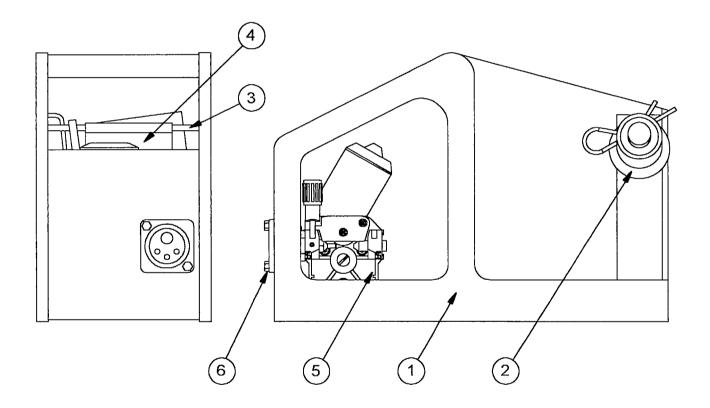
WELDMATIC 215S POWER SOURCE ASSEMBLY
